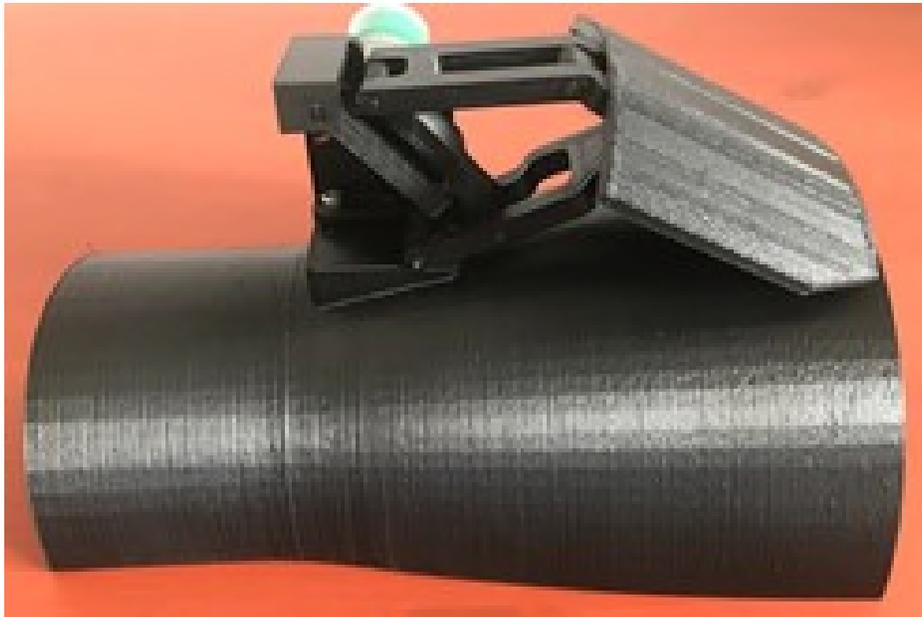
Thrust Vector Control mechanism – 3D printed prototype
